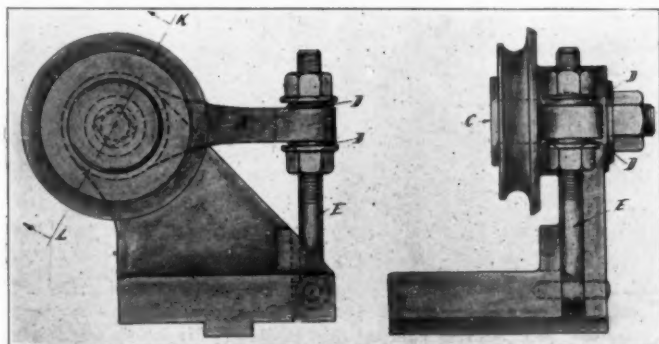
CIRCULAR FORMING TOOL-HOLDER WITH LOCKING DEVICE FOR CUTTER.
